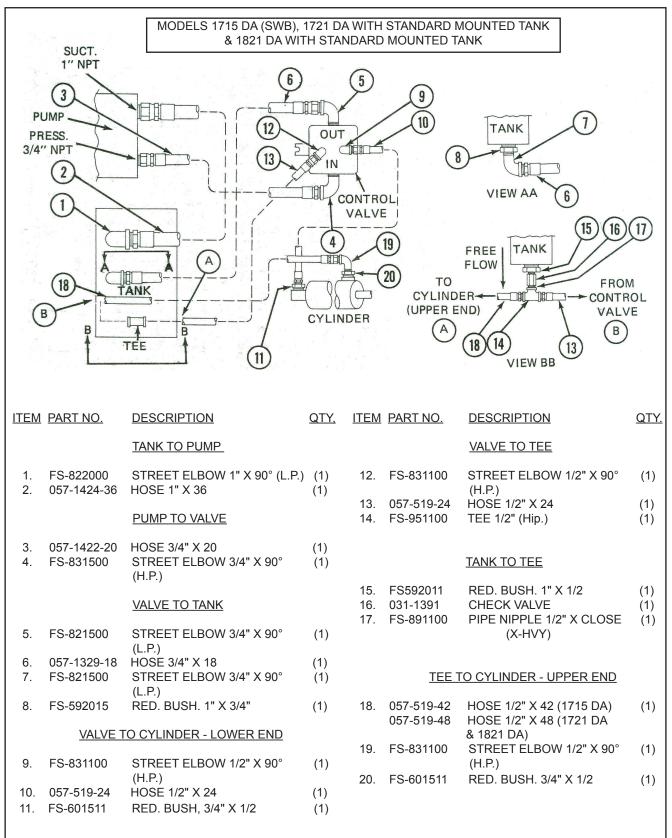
Hydraulic Lines (Sheet 1 of 4)
